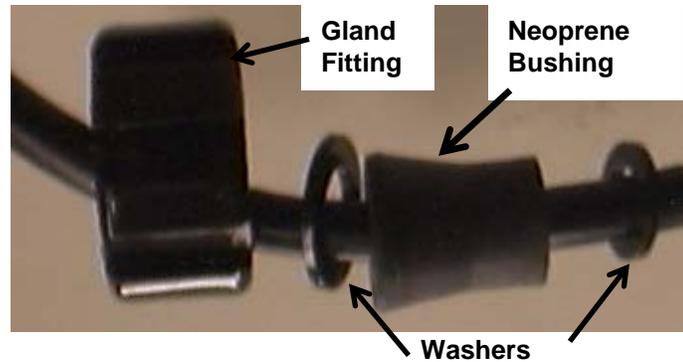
Load Cell Cable Fed Through Fitting Parts
